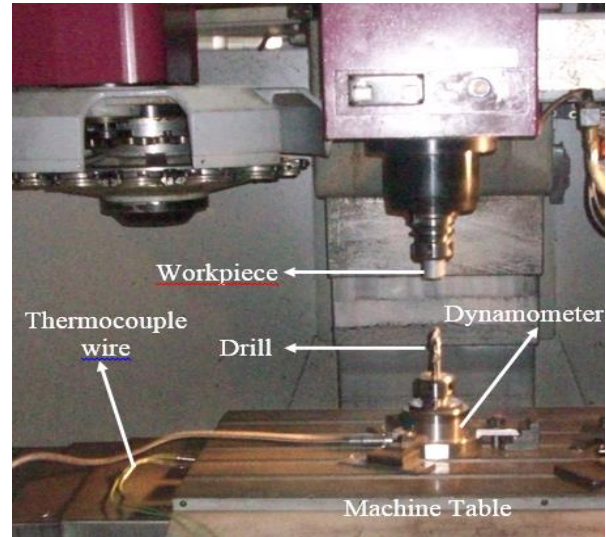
CNC vertical milling machine and measurement method used in the experimental study [3, 4]
